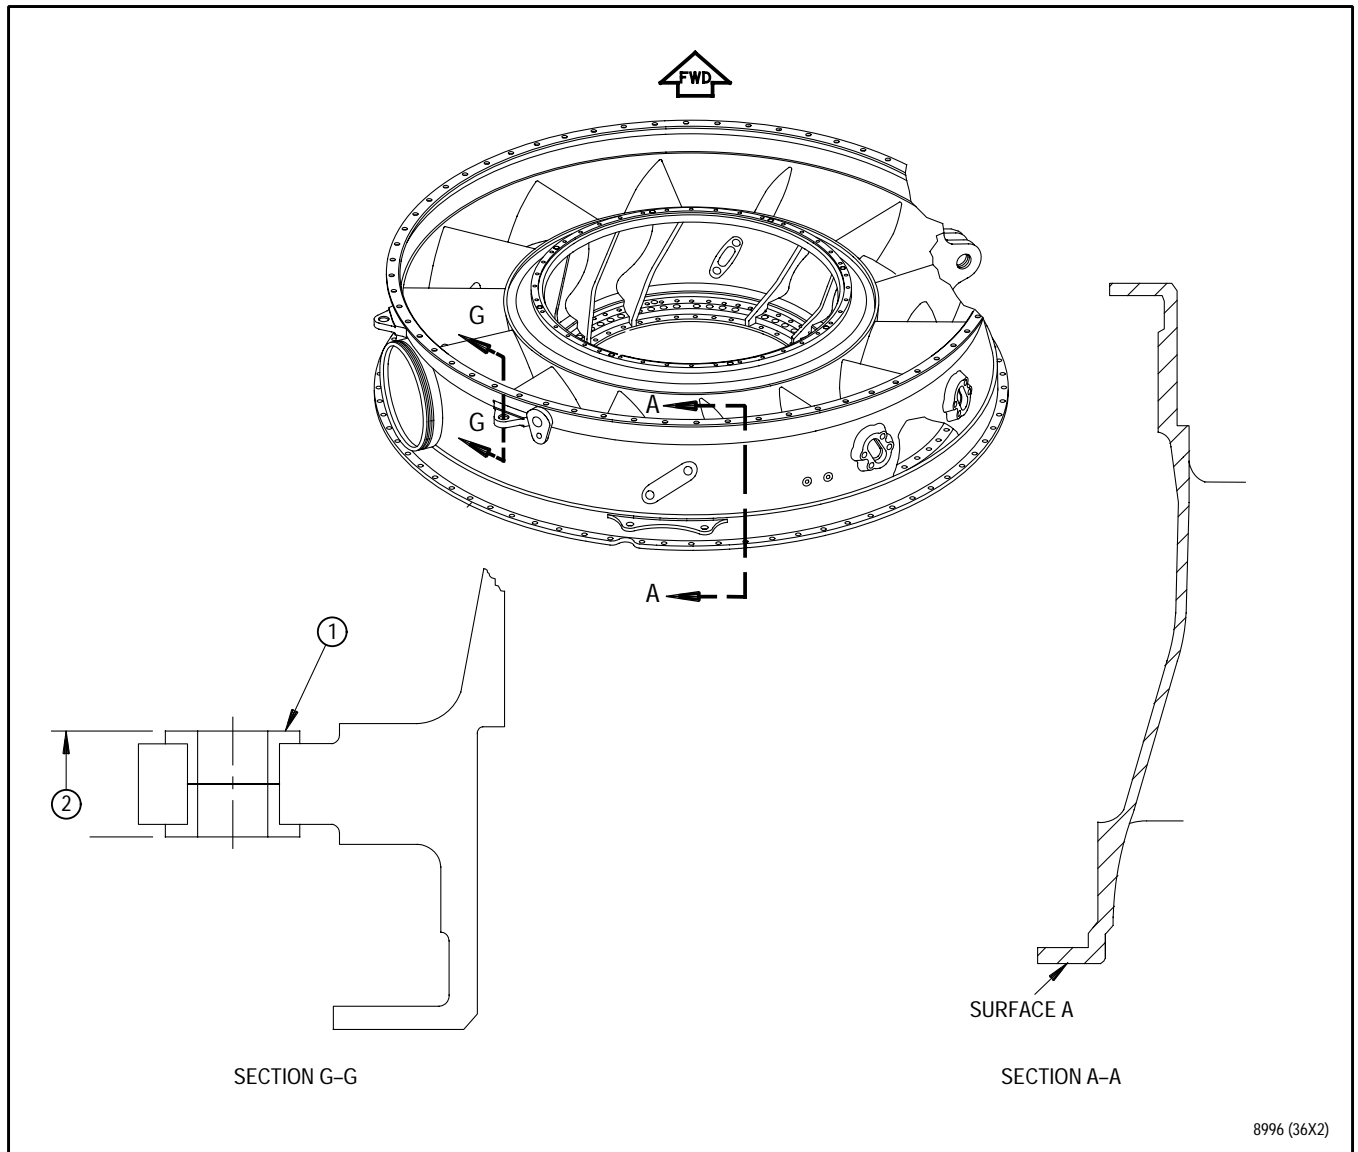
Compressor Intermediate Case Assembly - Gearbox Mount Bushing
